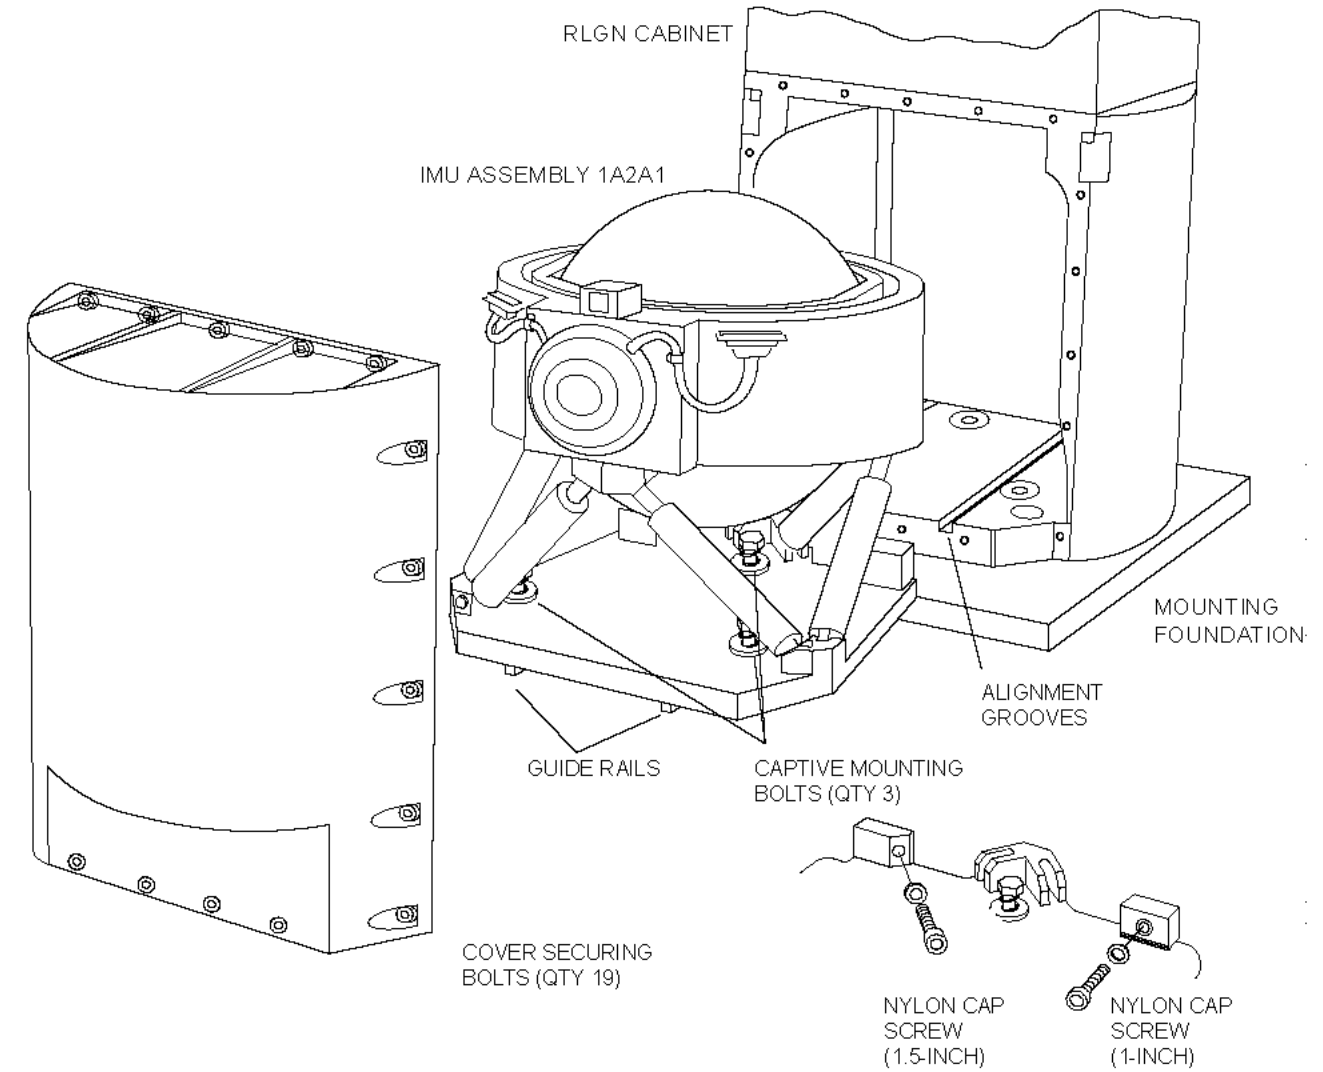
Inertial Measuring Unit in Measurement Cabinet Assembly
